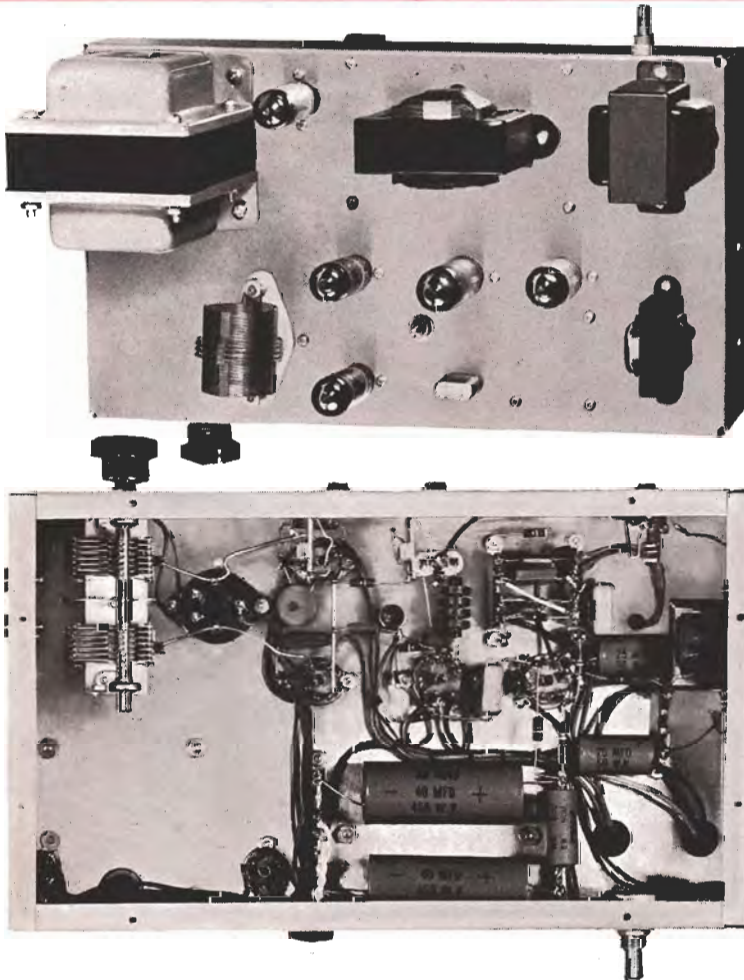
Top view of the double sideband transmitter, showing the locations of major parts on chassis deck. Check to see that sufficient space is provided for components which differ in size and shape from those listed. The audio filter inductor (L₂) and the microphone transformer (T₃) should be oriented in the positions shown to prevent inductive hum pickup from the power transformer (T₁).
